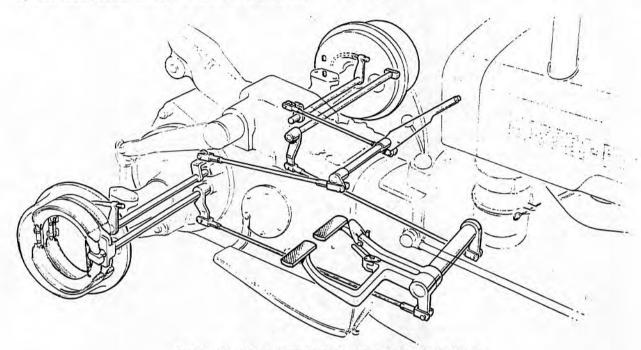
DUAL MECHANICAL BRAKE ARRANGEMENT
